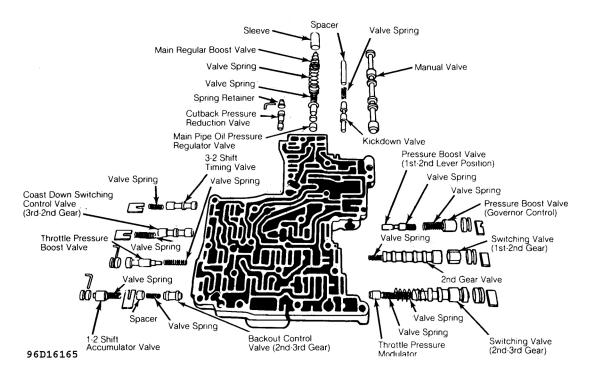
Exploded View of Valve Body Assembly Courtesy of FORD MOTOR CO.
